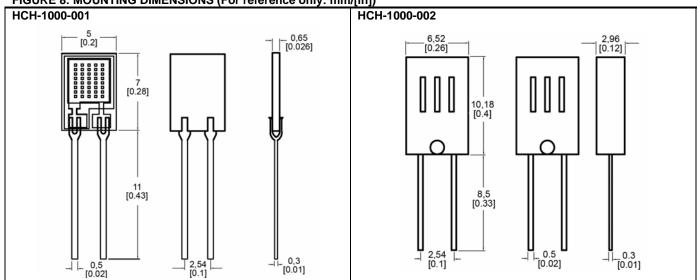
MOUNTING DIMENSIONS (For reference only: mm/[in])
